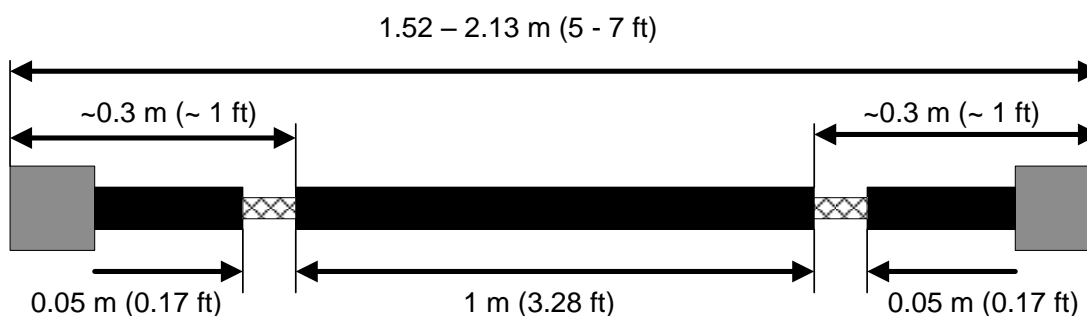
Shielded cable sample (When removing coaxial cable connectors from measurement)
